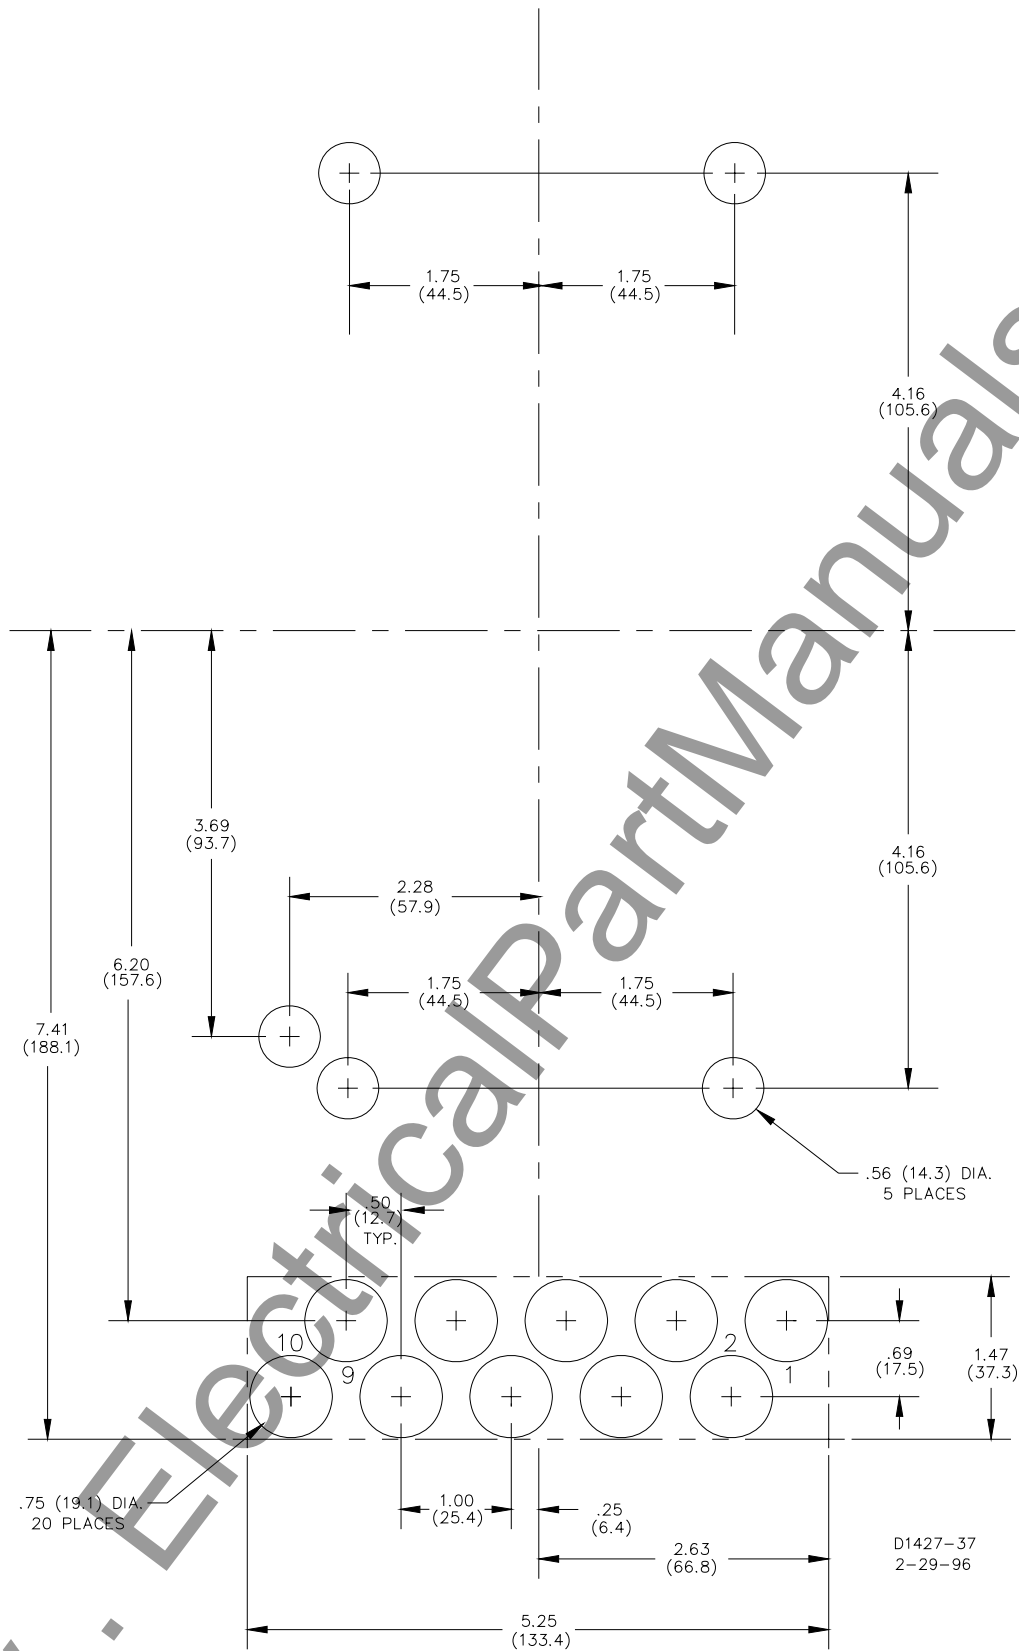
M1 Case, Cutting/Drilling Diagram, Projection Mounting, Single-Ended, Rear View
